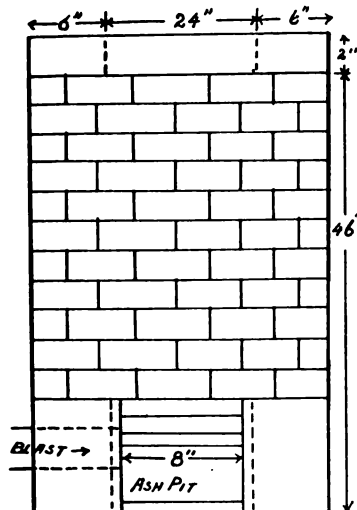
SHOWING FRONT VIEW OF FURNACE
